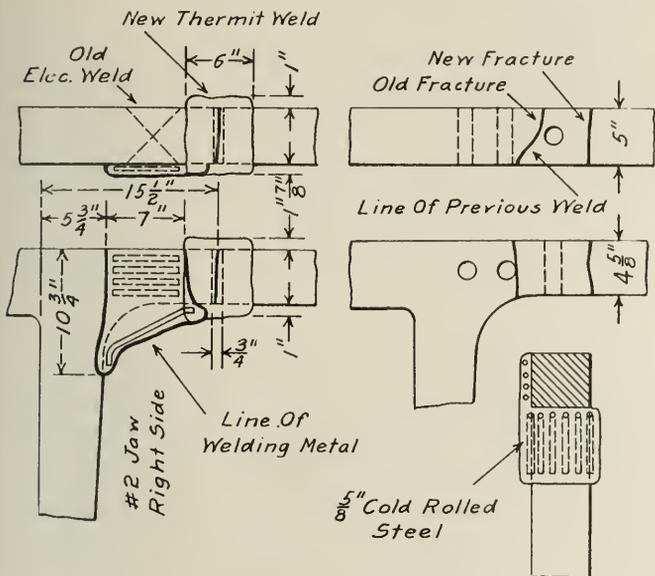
Cast Steel Frame Thermite Weld
